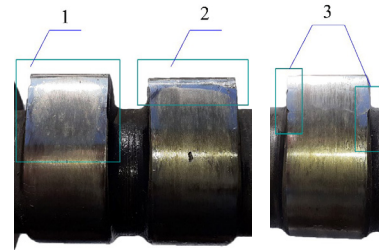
Typical cam defects: 1 – signs of wear on the profile; 2 – deformation of the tip; 3 – chips and cracks
